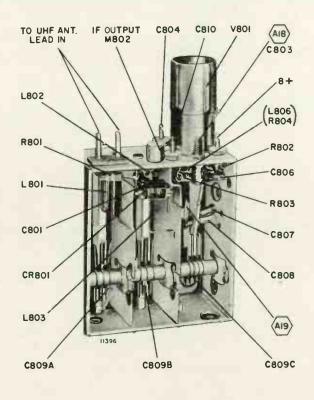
Side View of UHF Tuner 94D162-3 with Cover Removed, Location of components and adjustments shown.
